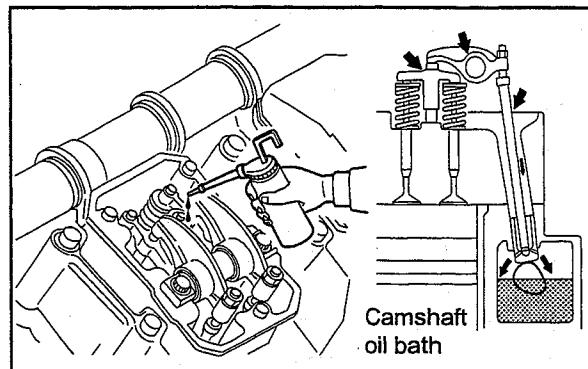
Pouring engine oil on valve mechanisms and chamber
